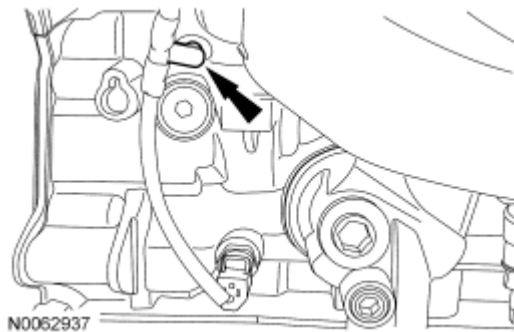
Identifying Wiring Harness Pin-Type Retainer
